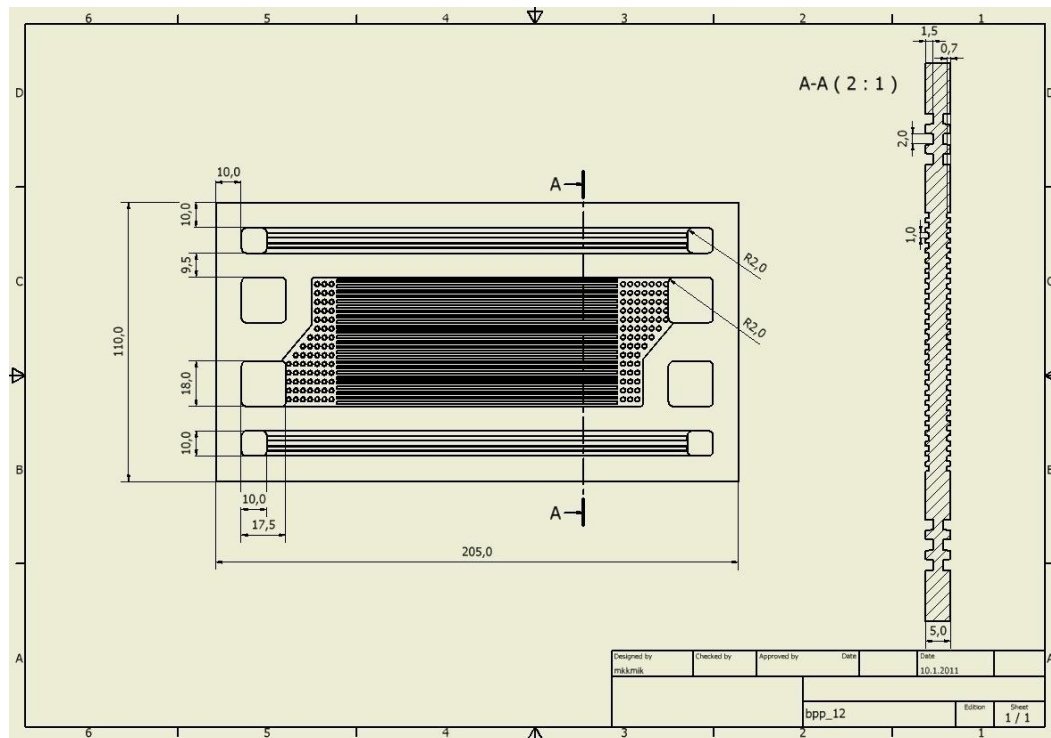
The new bipolar plate design, top view and cut view enlarged
